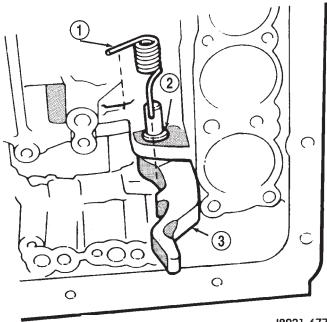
Park Lock Pin, Spring And Pawl Installation
